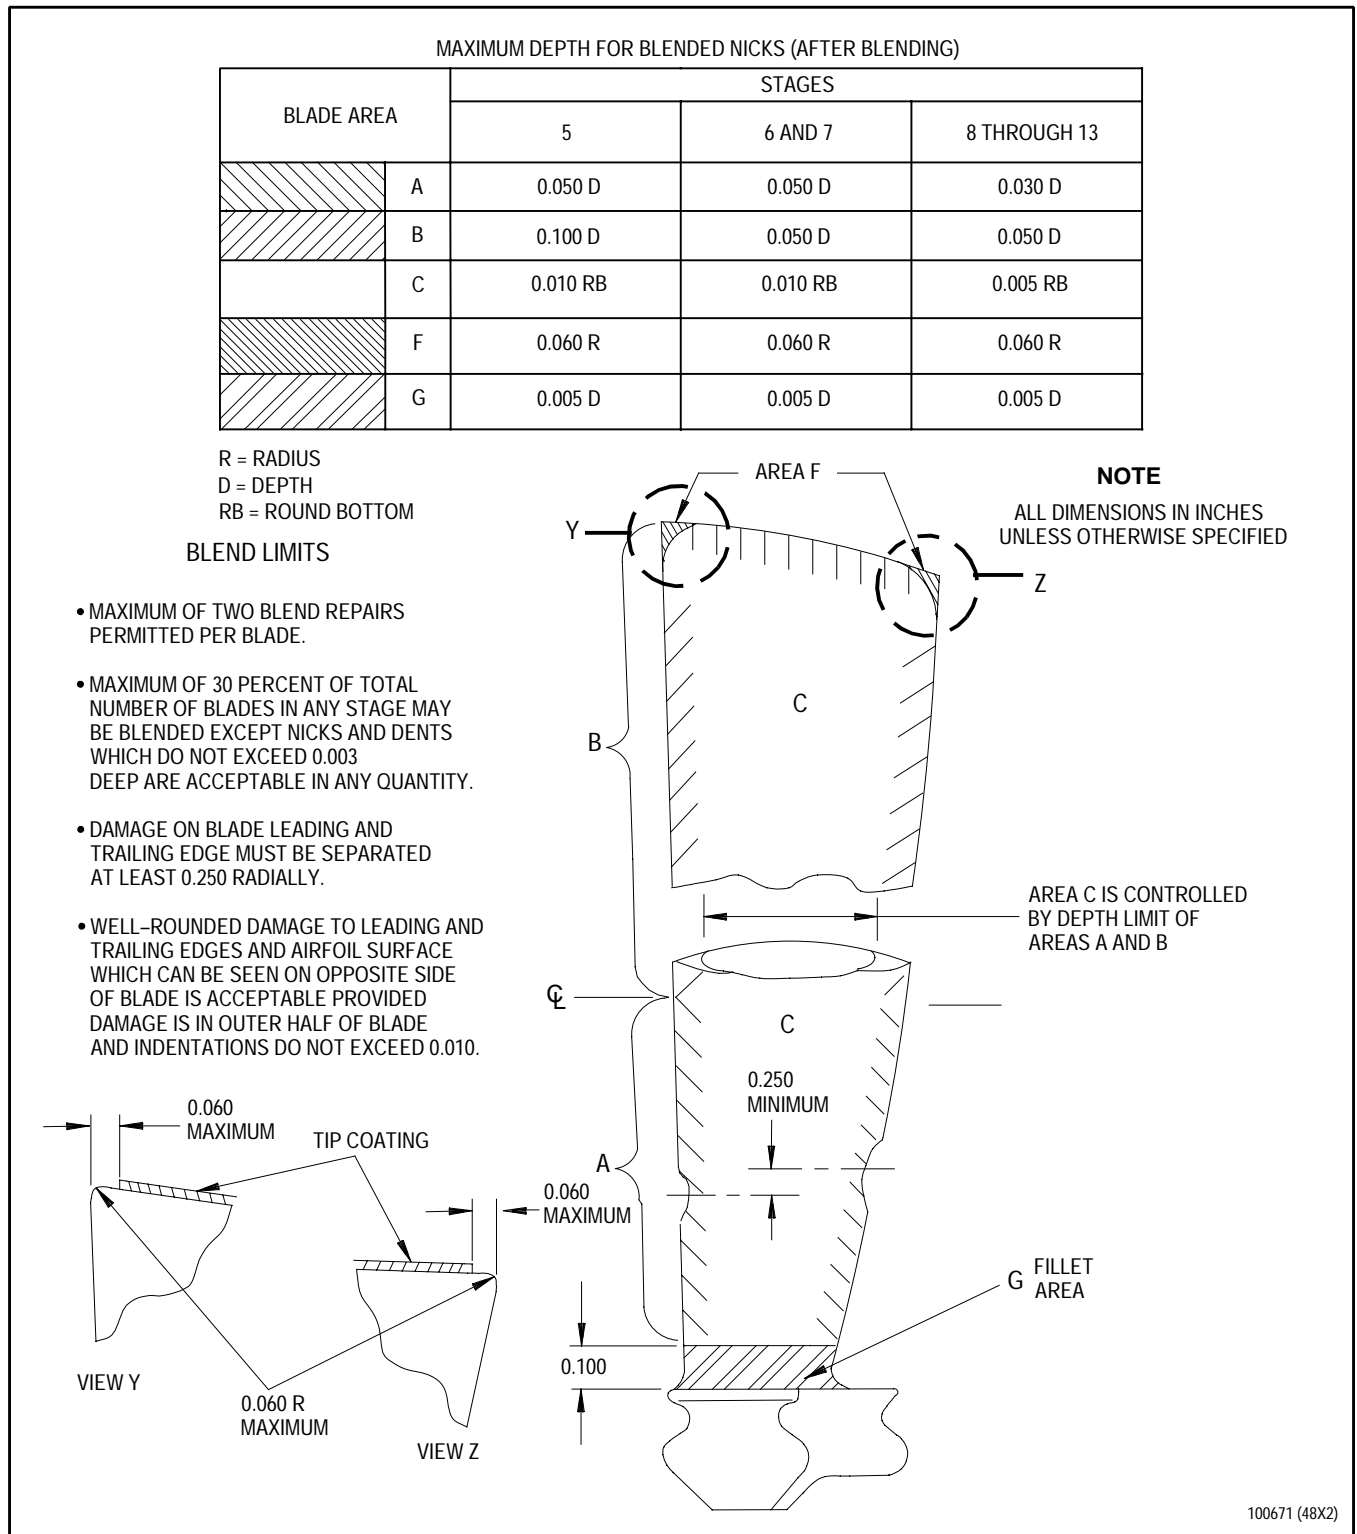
C. Fifth Through Thirteenth Stage Compressor Rotor Blades - Blend Limits
